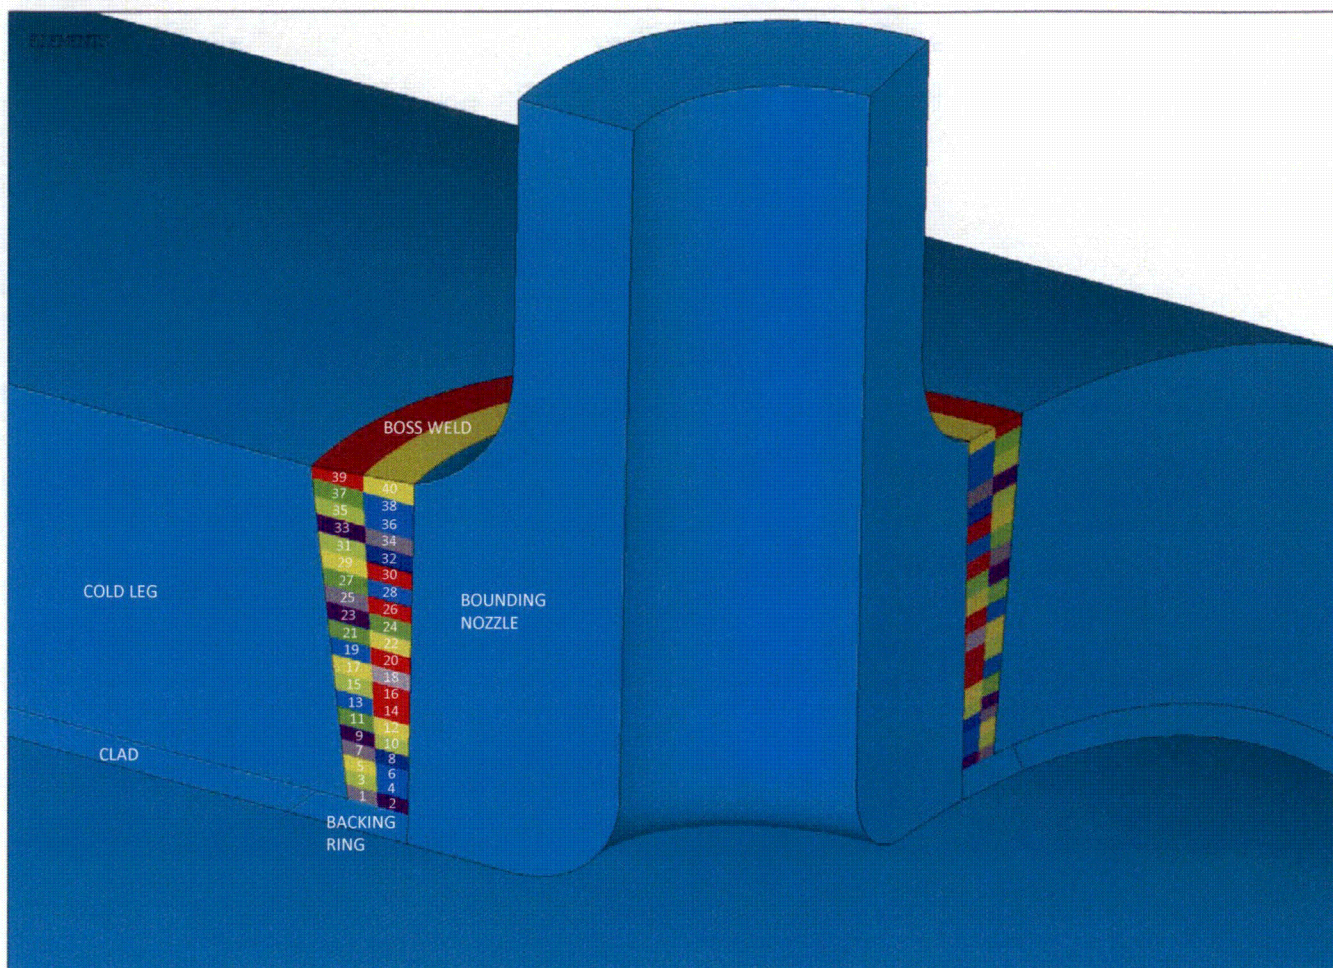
Weld Nugget Definitions for the Boss Weld
